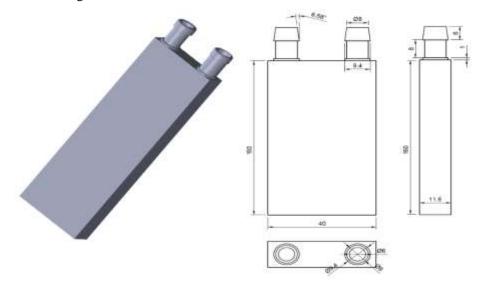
Schematic view of the aluminum liquid cooling block heat sink
